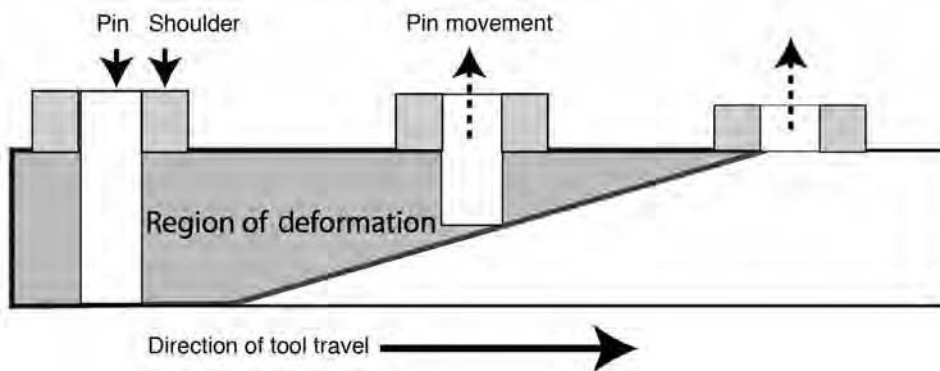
Schematic showing how an adjustable probe can be extracted to eliminate an exit hole. Source: Ref 39
